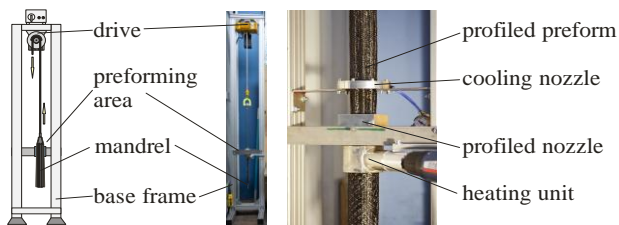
Prototypic test stand for investigations on profile forming parameters: Schematic representation (left), realized device (right)
